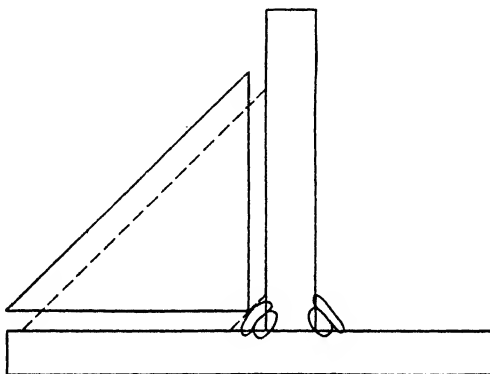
Note the fit-up problem caused when the corner is left on a gusset that fits up to a weld (solid lines); and note the fit-up when the corner is cut off. These corners should be cut off when the part is originally cut. (Courtesy of R. G. LeTourneau, Inc.)
